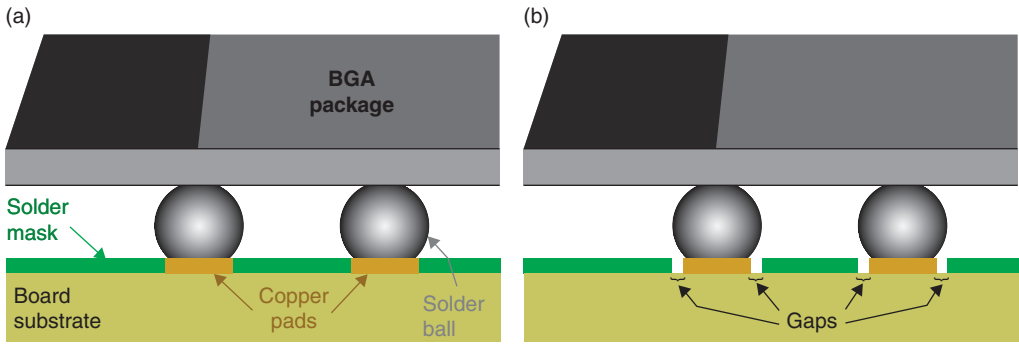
Soldermask definitions for BGAs. (a) Soldermask defined. (b) Non-soldermask defined—preferred.
